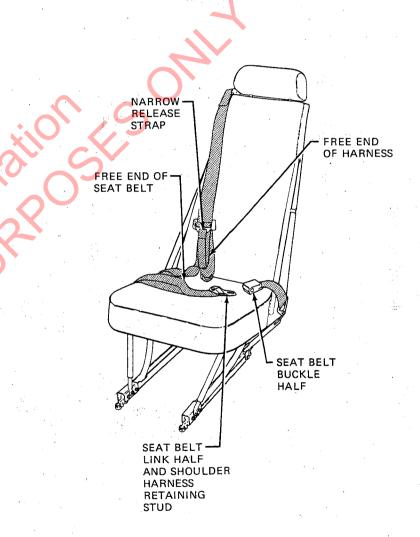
Seats, Belts and Shoulder Harnesses (Sheet 2 of 2)
